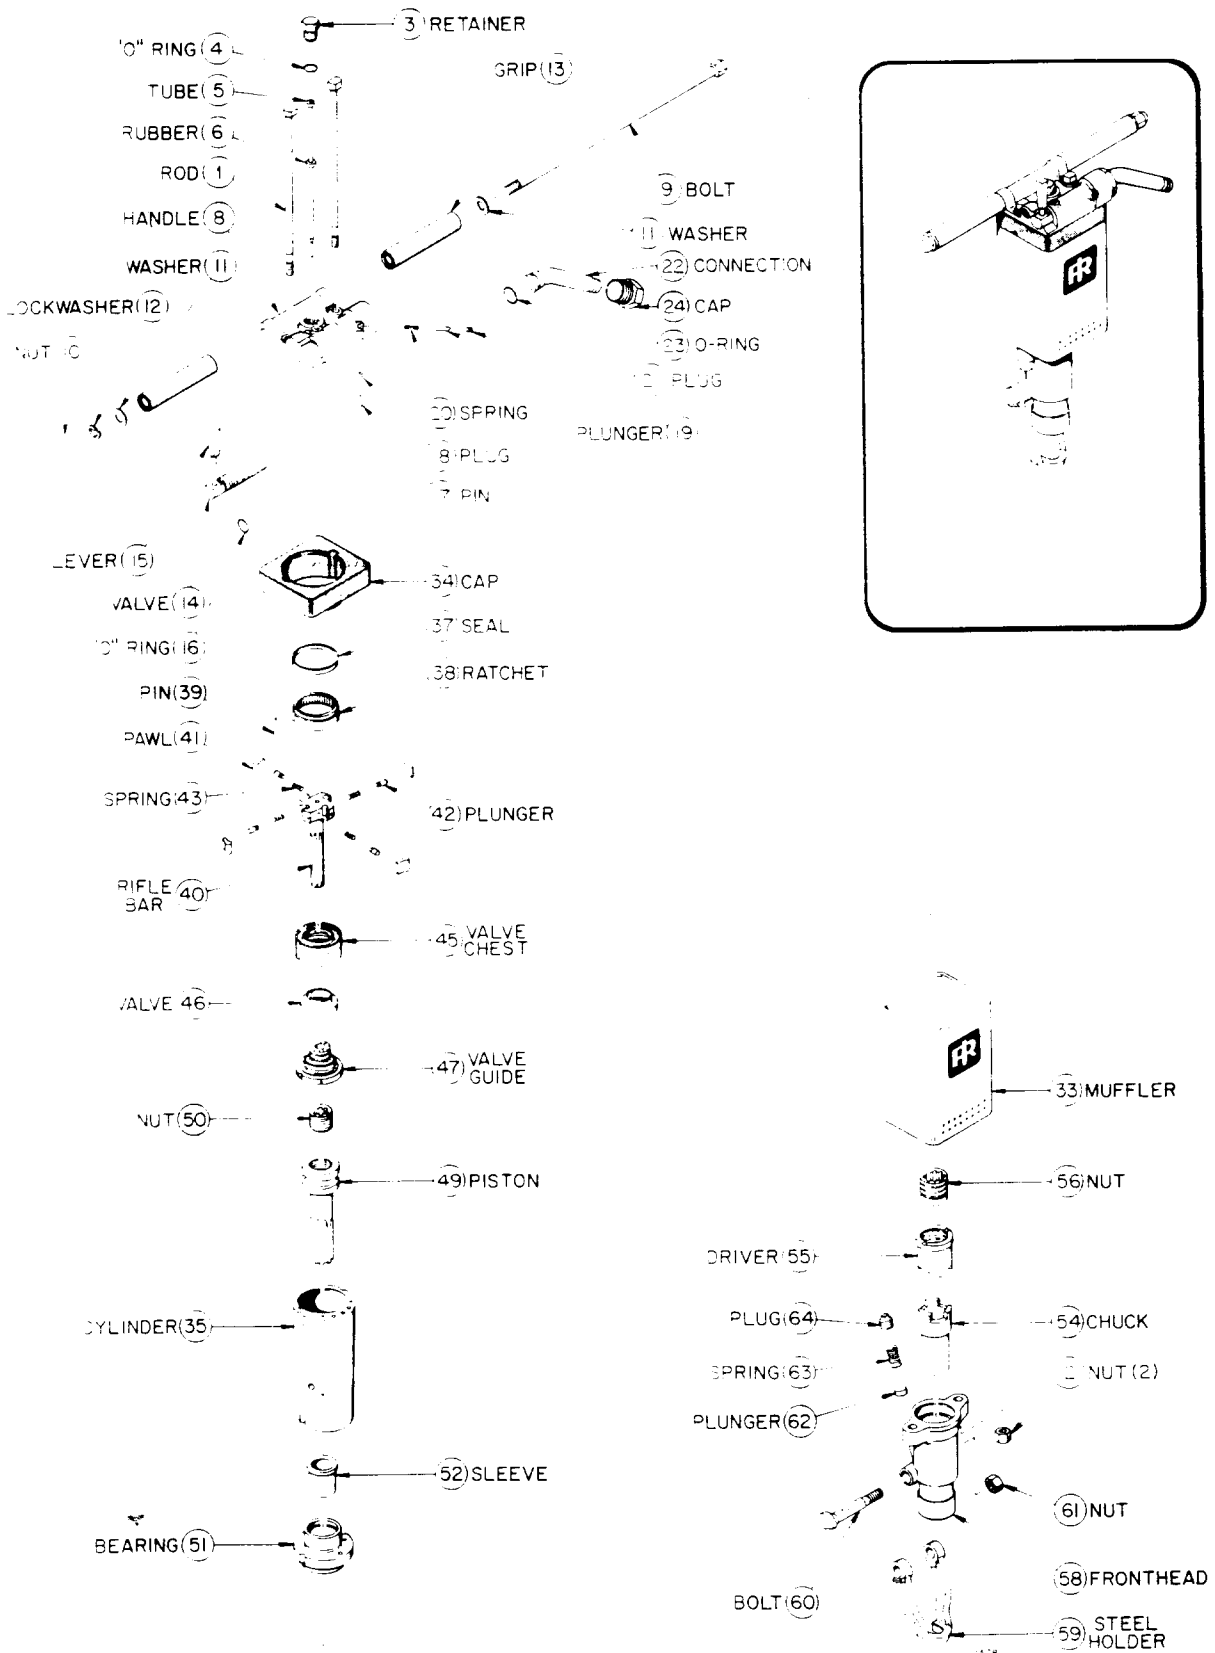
JH40 Jackhammer (Yoke Type Steel Holder)
